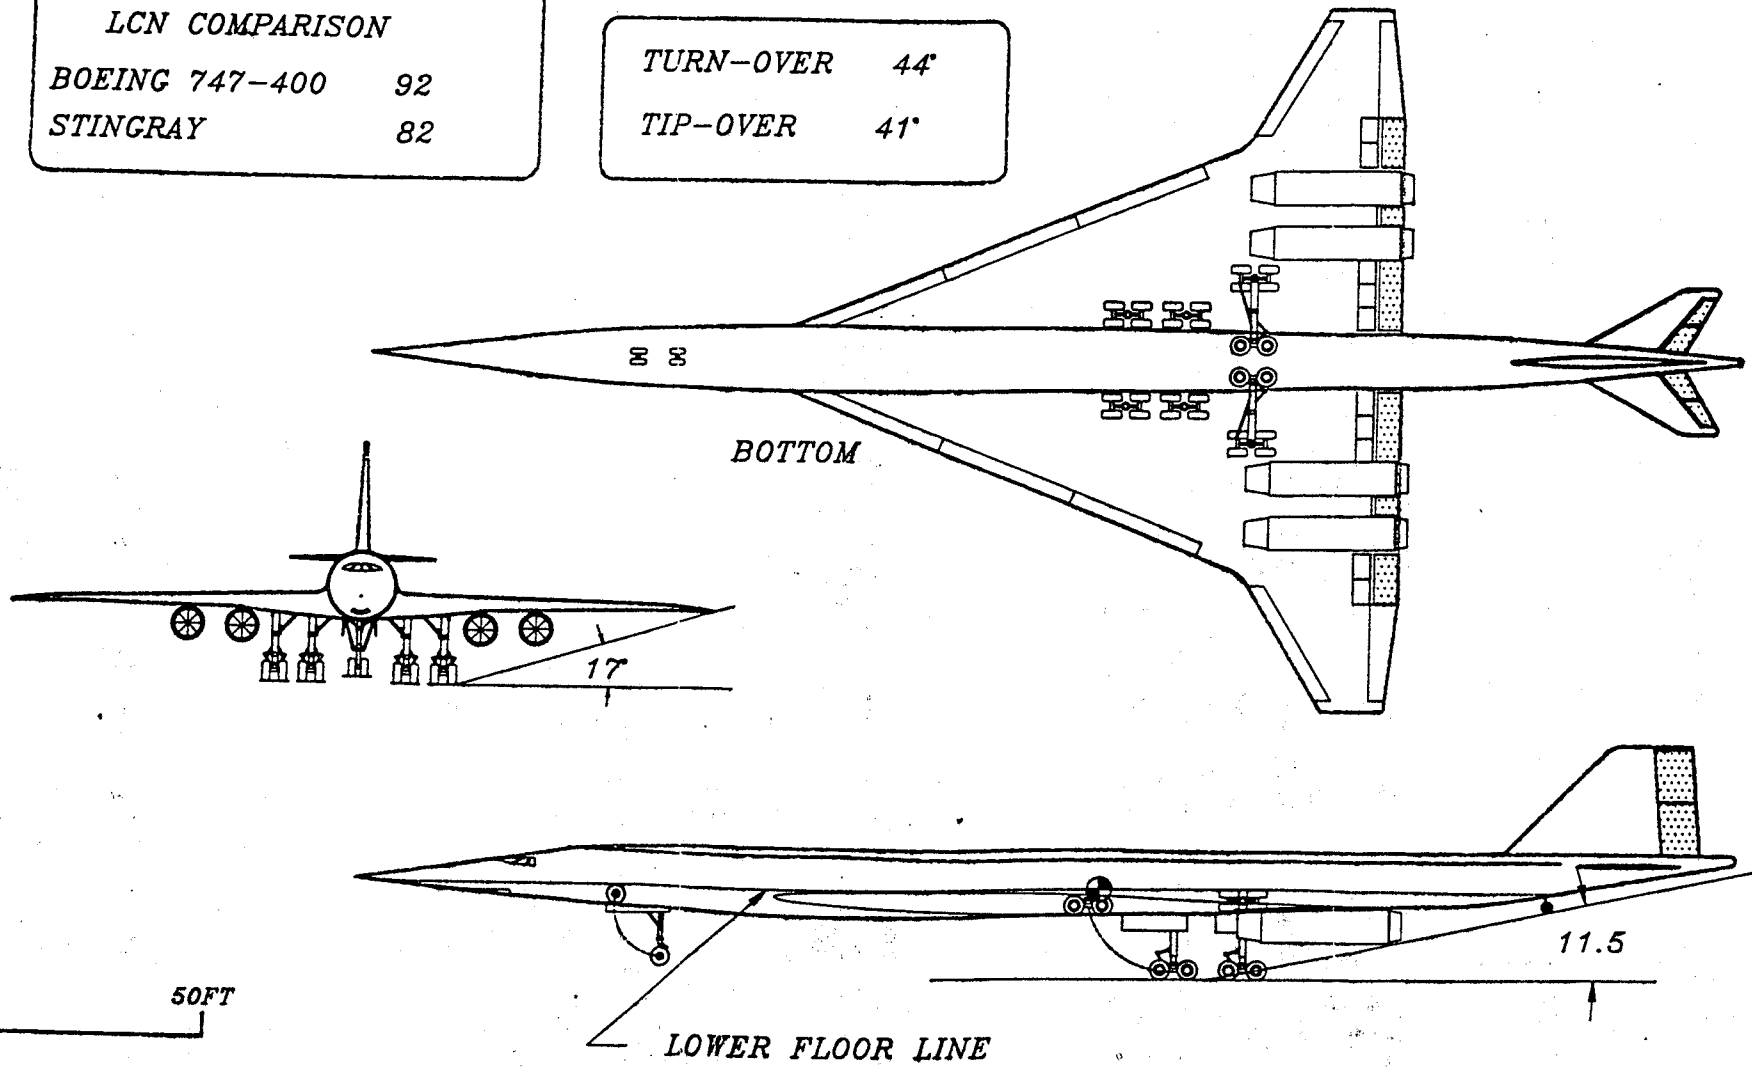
STINGRAY LANDING GEAR LAYOUT
